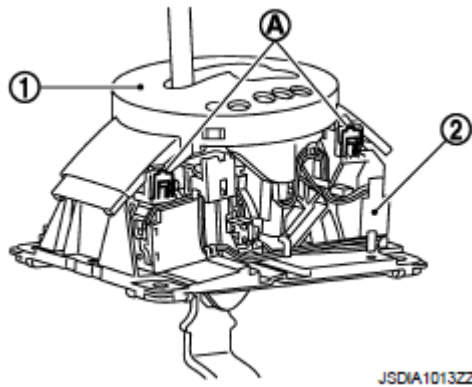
Identifying Position Indicator Plate And A/T Shift Selector Assembly
